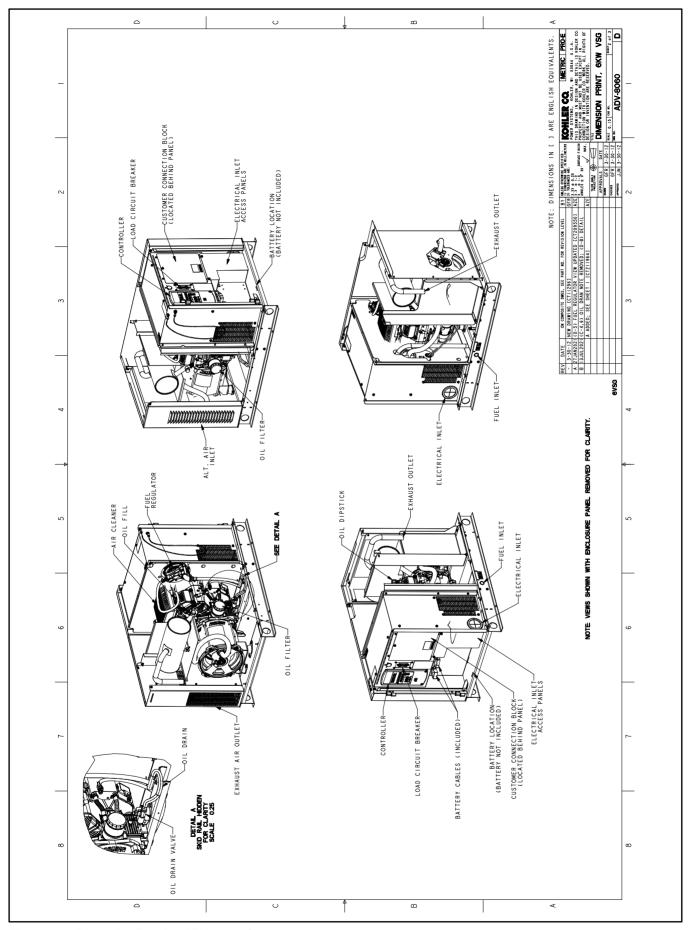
Dimension Drawing ADV-8060, Sheet 2
